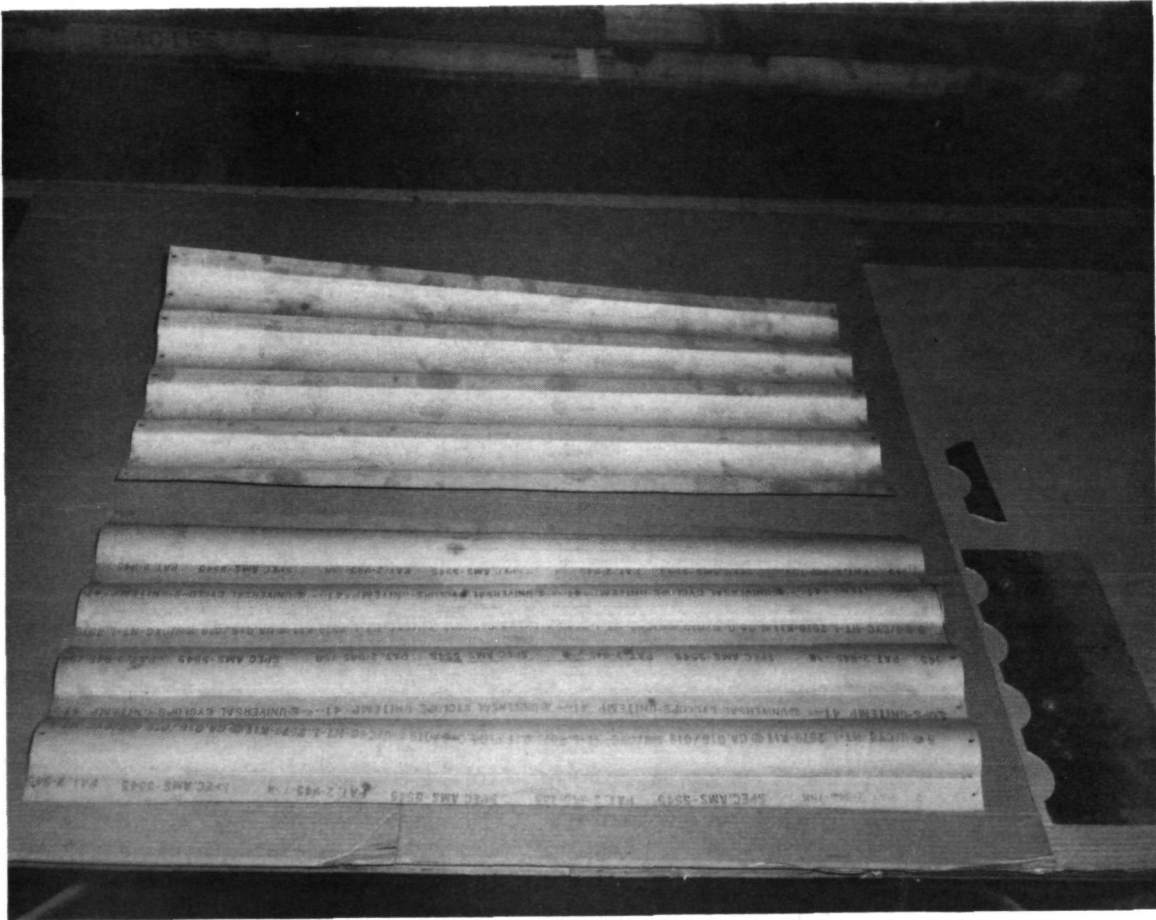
PANEL HALVES WITH UNIFORM SECTION FORMED
